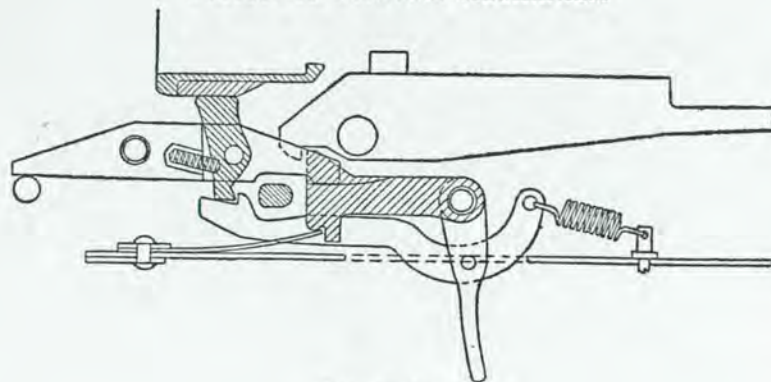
shows the normal position of the trigger mechanism. The ramp in the breech casing over the hand sear and the feed piece engaged on the sear.
